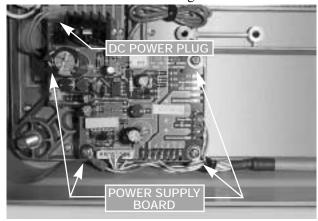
Disconnect DC Power Supply Plug and Remove the Four Power Supply Board Screws
